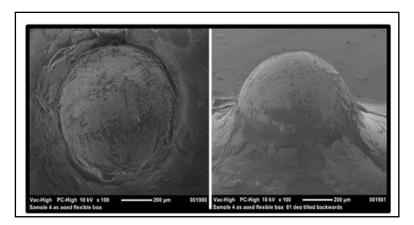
SEM images of the BGA solder joints test of the 99 hours of ATC.
